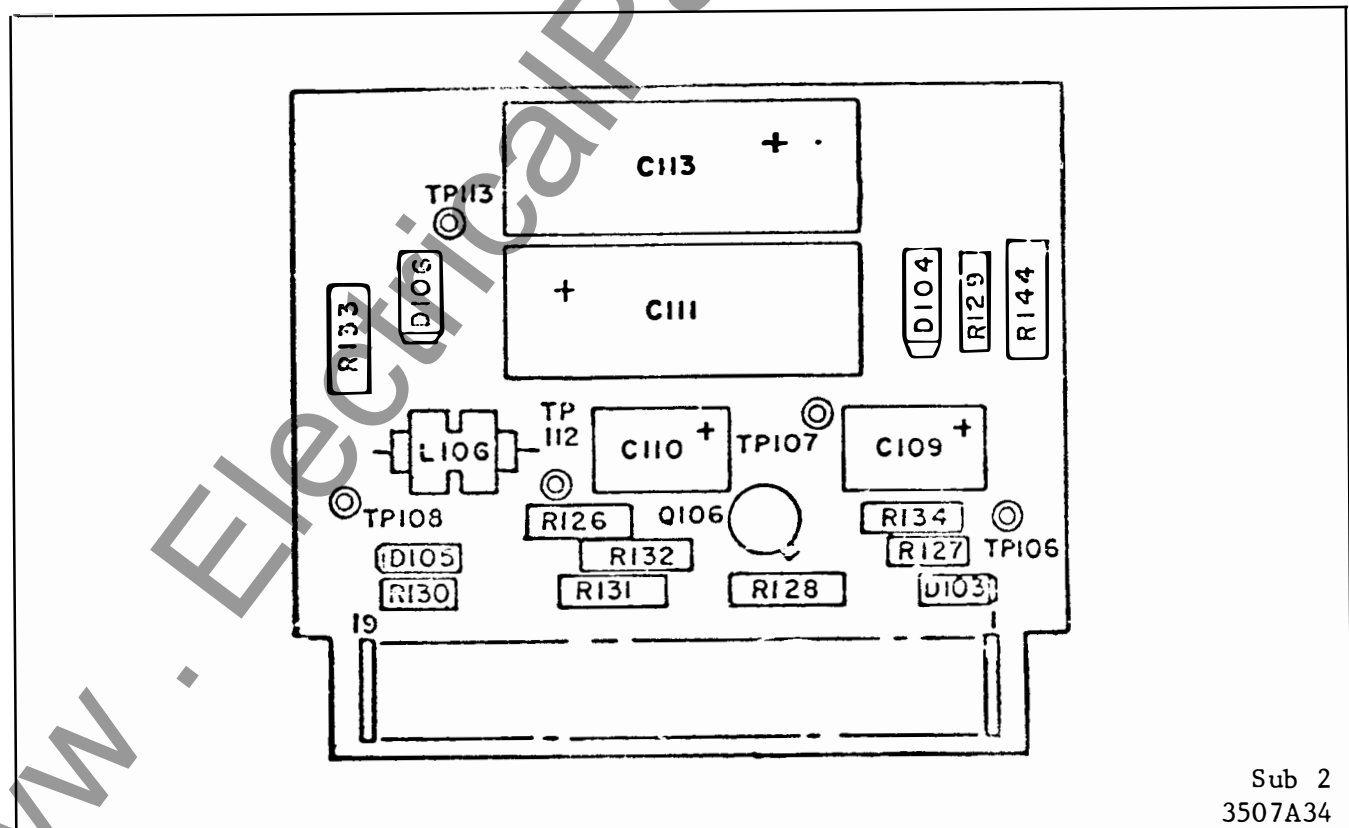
Power Amplifier Printed Circuit – Parts Location
